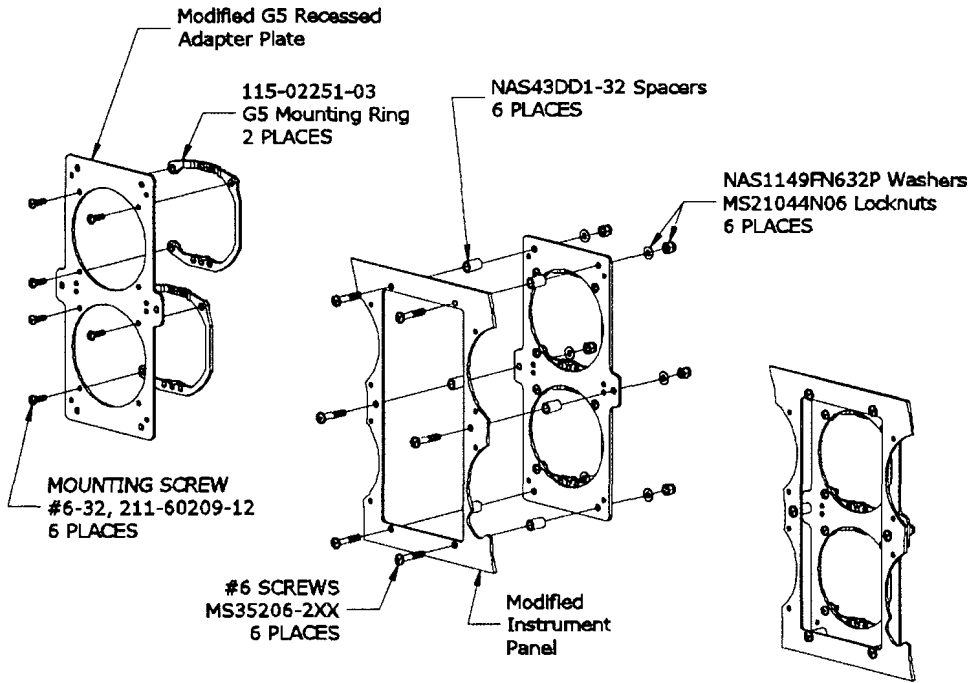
Dual Vertical G5 Recessed Adapter Plate Installation
